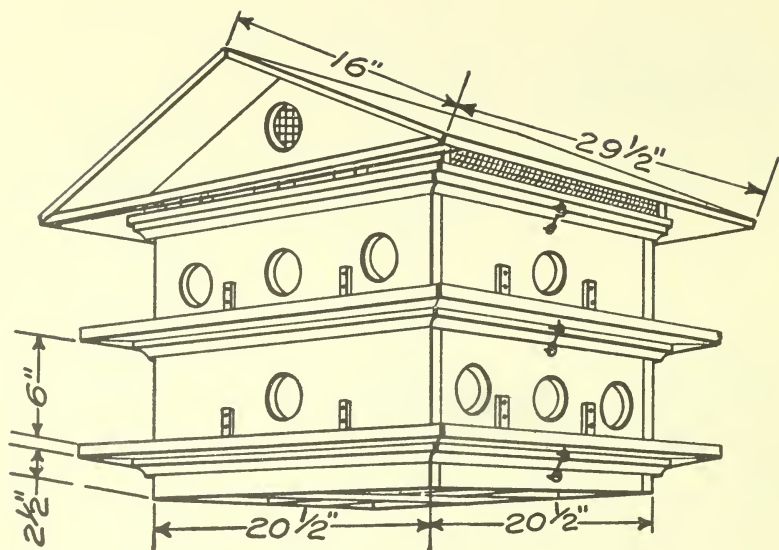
Martin house in which the foundation, roof, and each story are built as units of uniform lateral dimensions, permitting the addition of more stories as the colony grows and allowing ready access for cleaning. A central air shaft and an elevated roof, permitting the passage of air beneath the eaves, assure a cool temperature for the interior. A cove molding around the under side of the roof and each story holds the parts in alinement and pairs of hooks and screw eyes fasten the units together.
